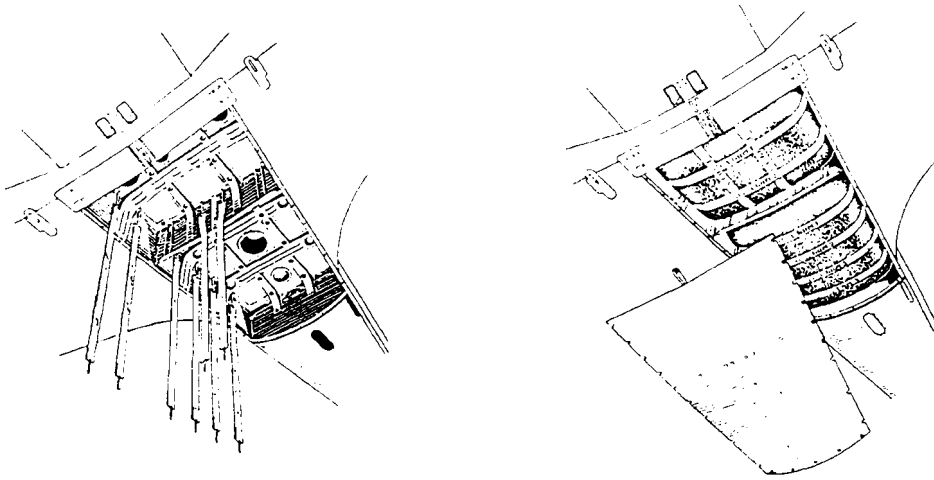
Fuel tank compartment with fuel tanks removed and installed
